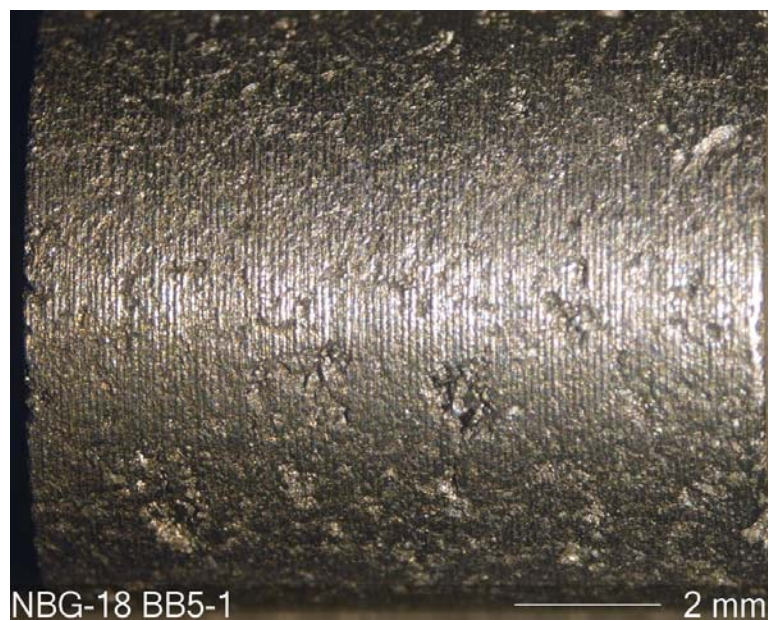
NBG-18 specimen BB5-1 macrograph showing surface roughness and machining marks
